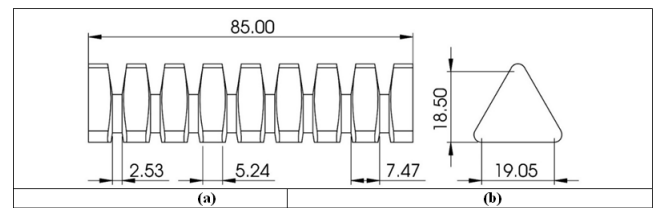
Cable-Driven Soft Manipulator Design. (a) Front-View, (b) Side-View(all dimensions in mm).
